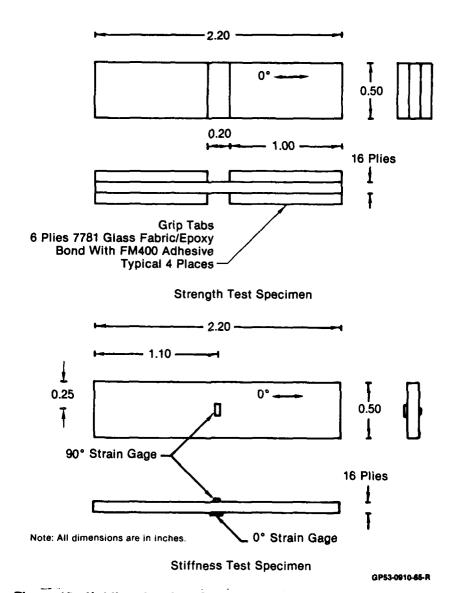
Unidirectional 0° Compression Coupon Test Specimens
